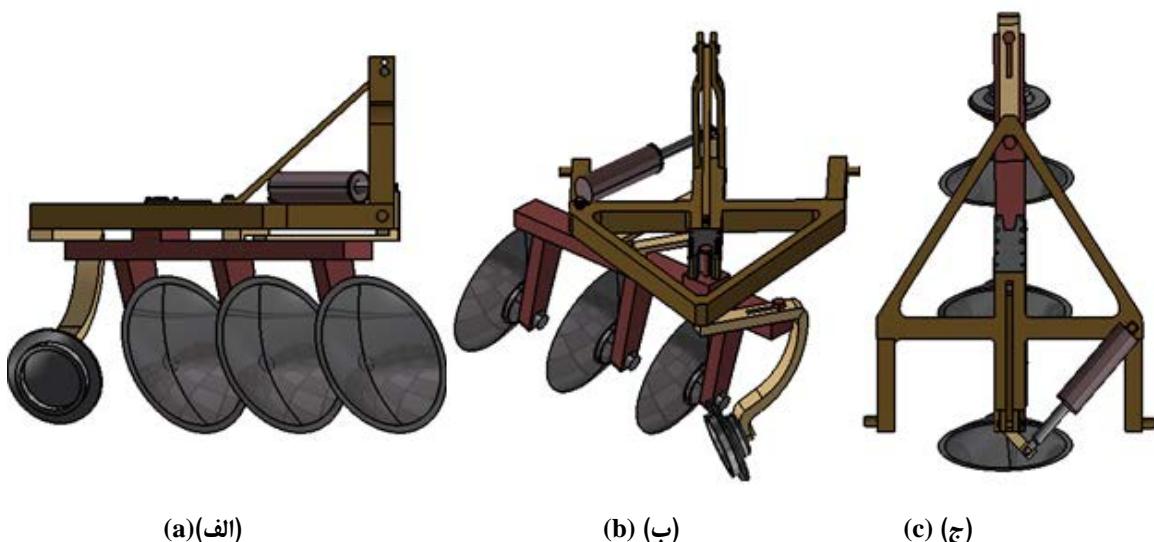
Top view of the mounted reversible disk plow with Daniel mechanism.
